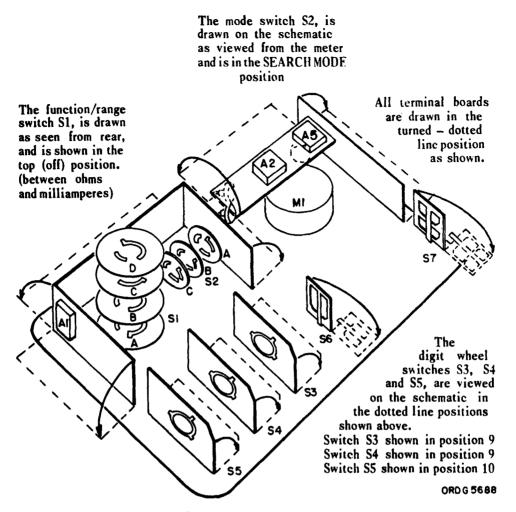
Physical location of switches, detector assembly, transistor assembly, and meter assembly.
